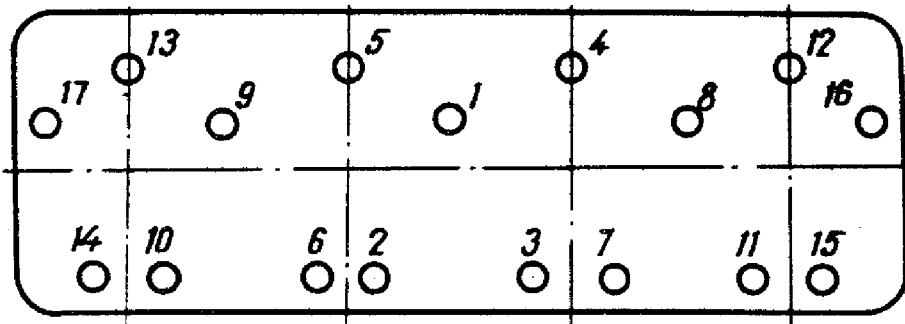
SEQUENCE OF TIGHTENING CYLINDER HEAD BOLTS
